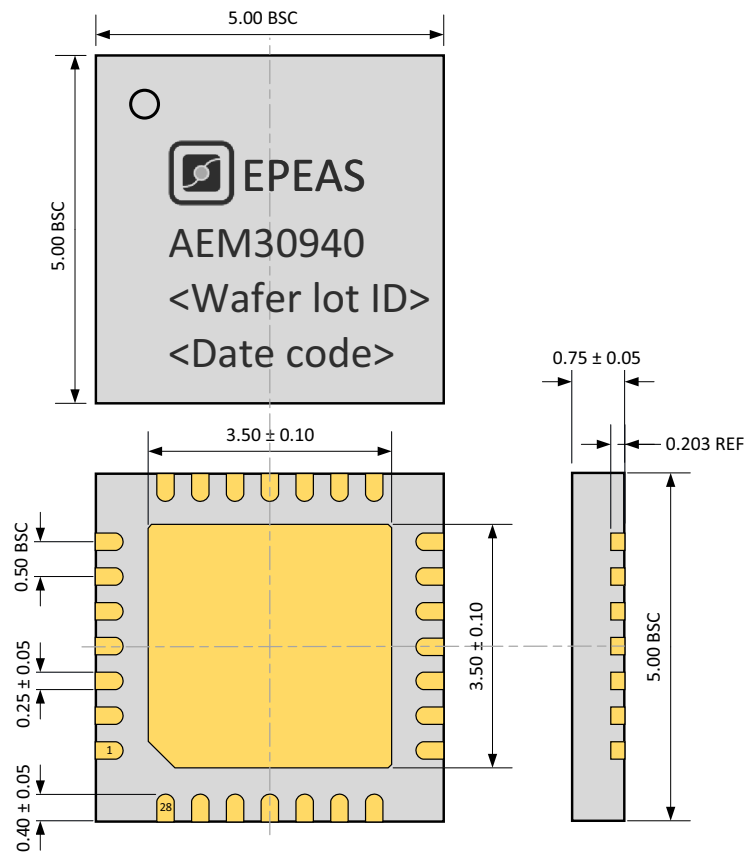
QFN 28-pin 5x5mm drawing (all dimension in mm)
